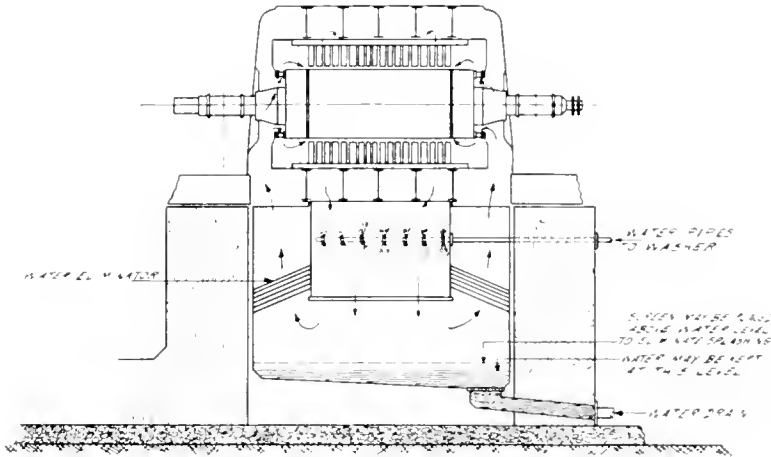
System of Ventilation in Which Inlet and Outlet Air Ducts and Air Rectifying Equipment Are Located Under Generator Foundation
